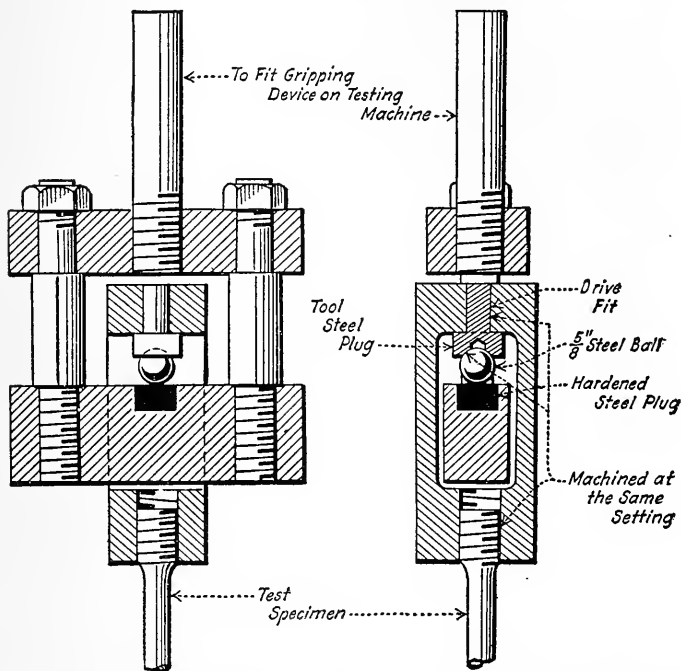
Shackles for insuring axial load on tension test specimen. (Robertson.)
